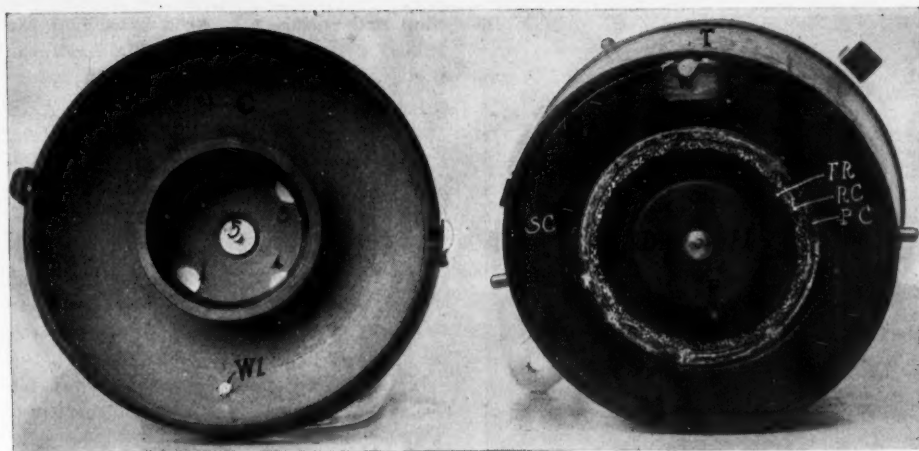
COVER REMOVED FROM AMERICAN IGNITER
